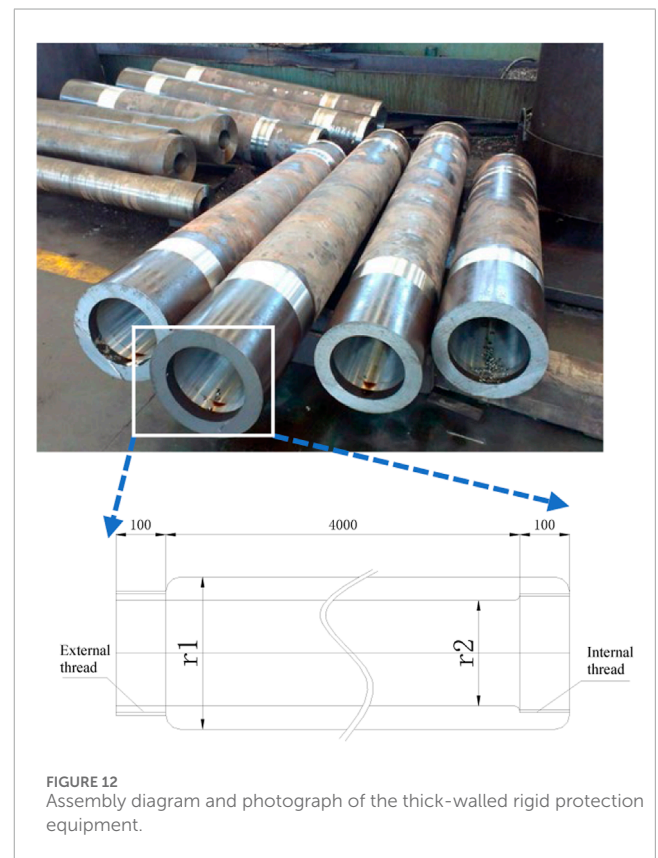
Assembly diagram and photograph of the thick-walled rigid protection equipment.
